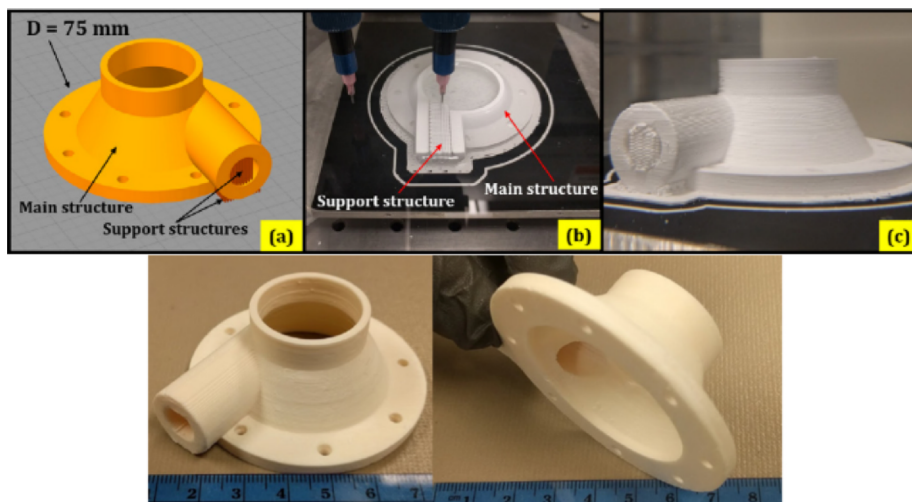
TOP: Sample turbine-blower housing: (a) CAD model with main and support structures, (b) part being printed, (c) completely printed part surrounded by oil. BOTTOM: Final turbine-blower housing part after removal of support and sintering. [188].
